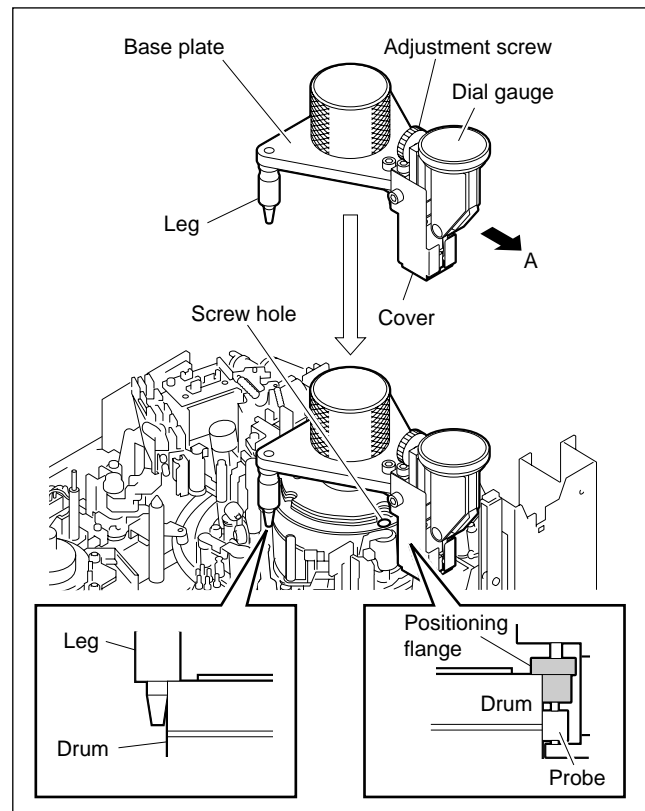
Setting of Head Tip Protrusion Measurement Gauge
